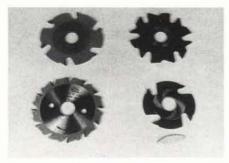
Top left: Conventional 4 in. carbide-tipped blade. Top right: chiplimiting blade. Bottom left: 12-tooth Elu blade. Bottom right: Lamello H-9 blade for small biscuits. All blades shown fit all machines.
